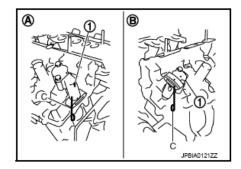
Removing Timing Chain Tensioners (Secondary) From Cylinder Head Courtesy of NISSAN NORTH AMERICA, INC.
